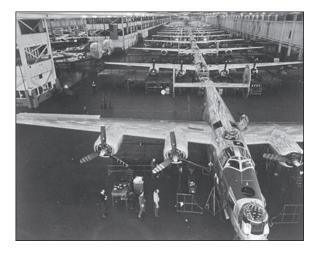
Final Assembly, Willow Run Plant, 1944
